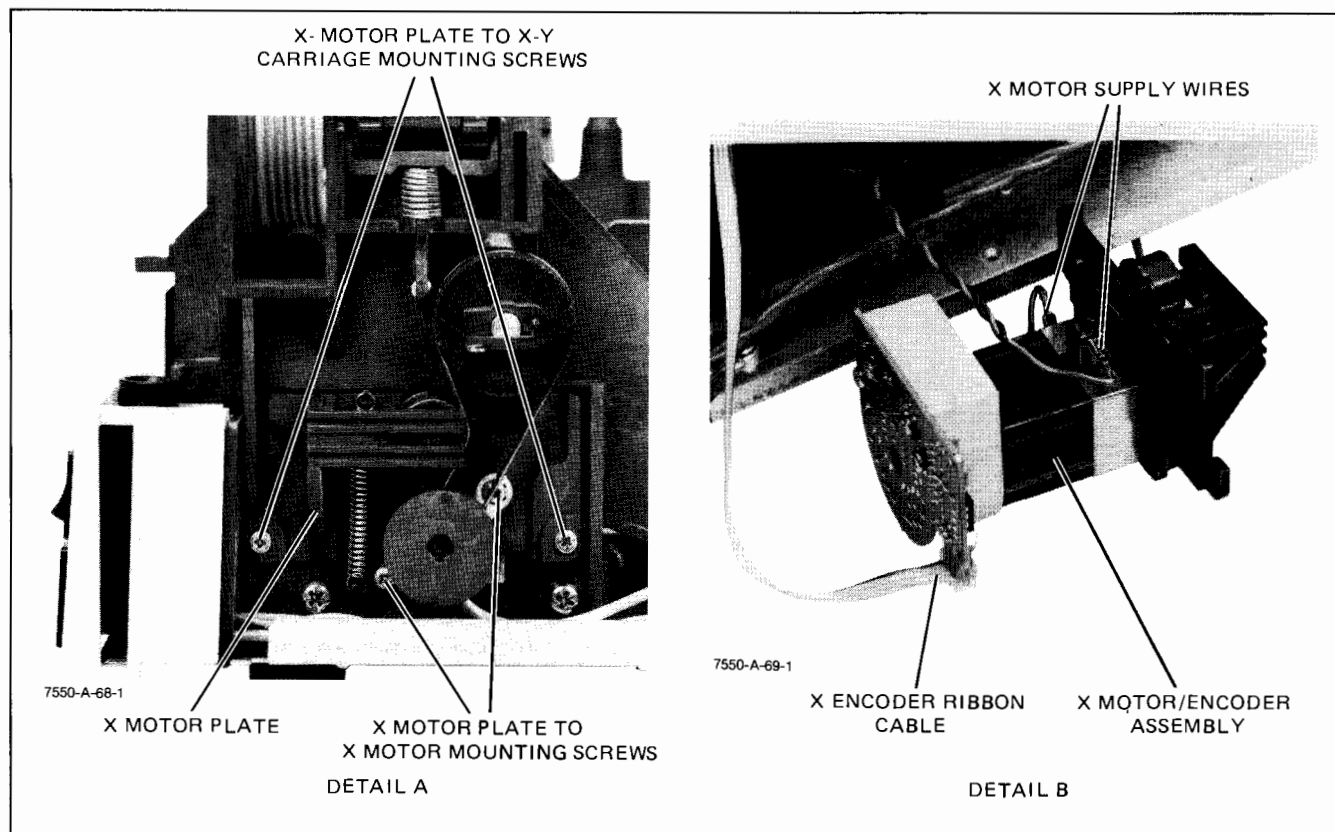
X-Drive (Media) Motor/Encoder Removal
